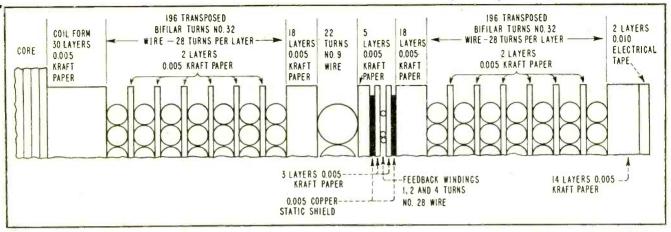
Cross-section of transformer winding buildup. Output winding is placed between two bifilar-wound sections of primary windings
